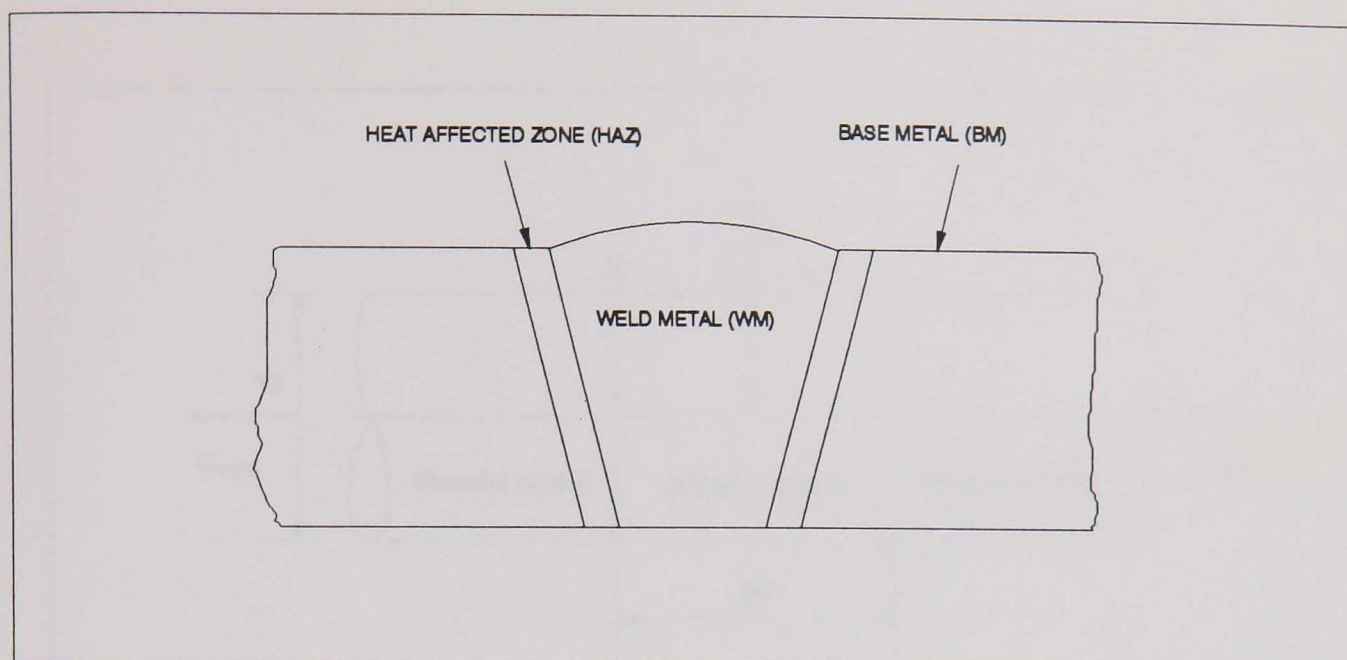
Schematic diagram of a typical weld.
